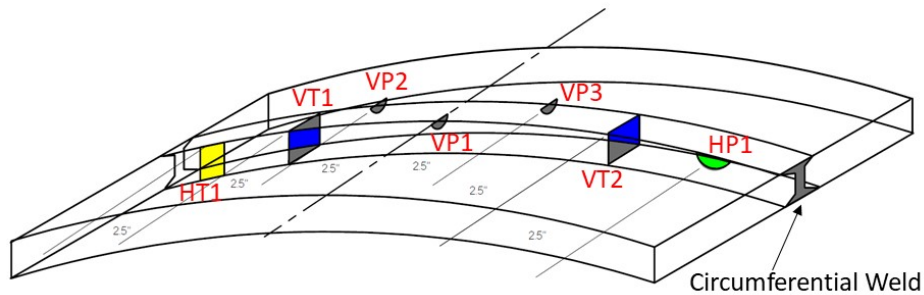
Large plate cut from a canister with an as-fabricated circumferential weld and the locations of starter cracks for CISCC test
